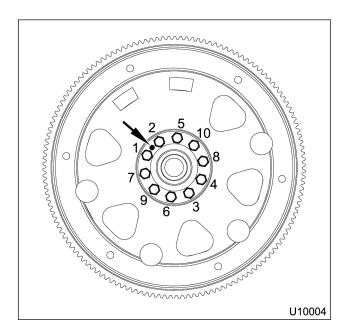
Torque sequence for flex plate flywheel assembly bolts and dowel location
